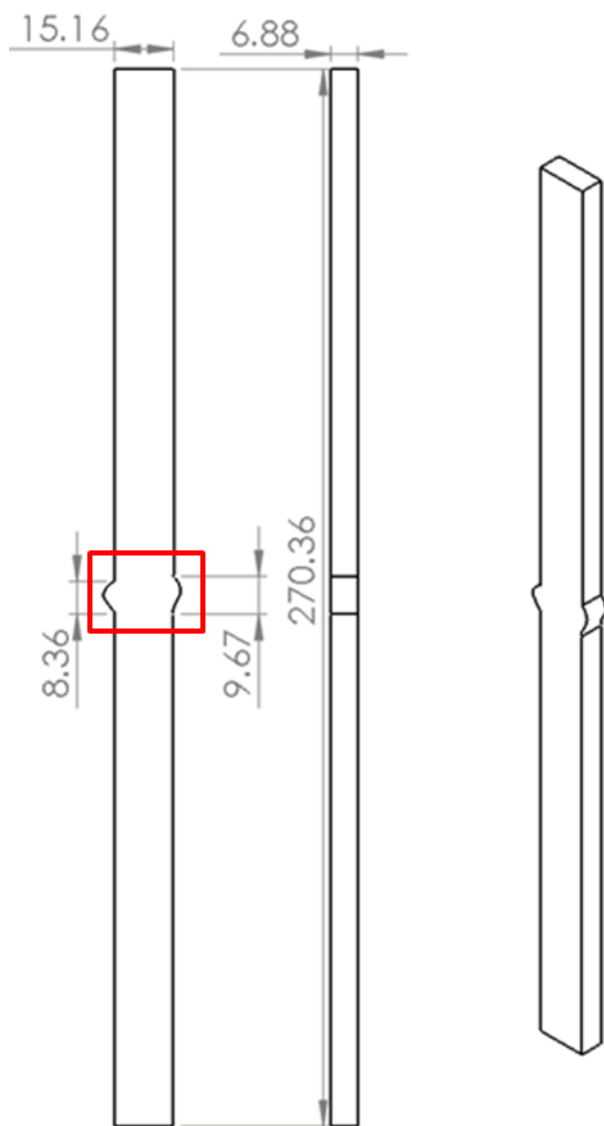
Design drawing of the FE model containing the real bead geometry.
